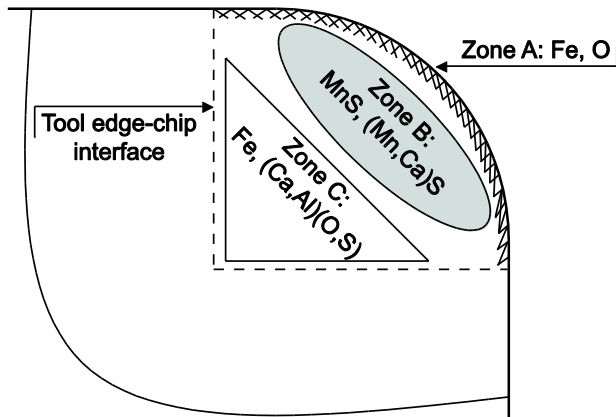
Schematic drawing of the tool edge-chip contact zone and the distribution of the transferred Fe, O, Al, Mn, Ca, and S from the workpiece^{55,98}.
